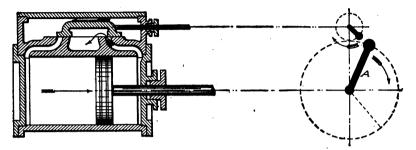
Valve Position with Steam Port Closed on Head End motion of the piston will cause the valve to move toward its midposition.
